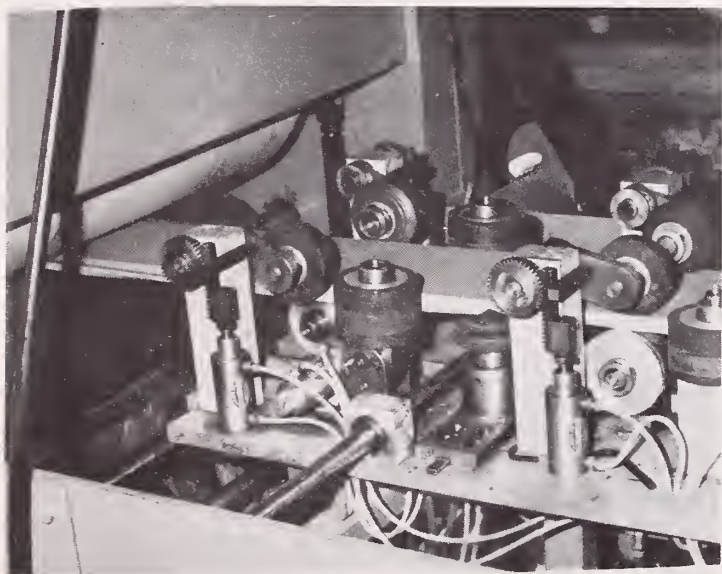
The outfeed end of the roll laminator contains the roller system that wraps an overlay around the edges of the board.
